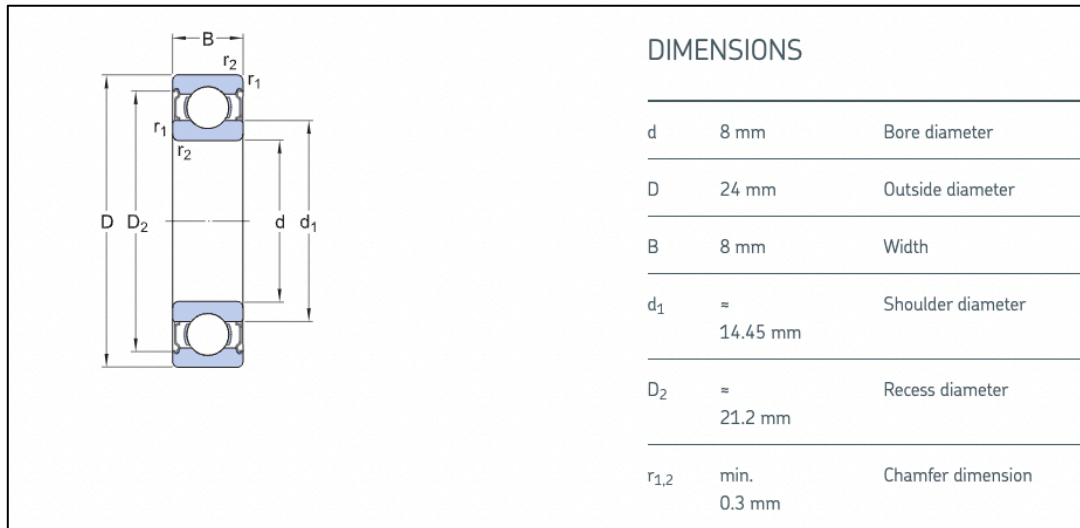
DATASHEET for ball bearing 628/8 -2RS showing the design specifications for the ball bearing to be placed in (Figure provided by SKF.com)
